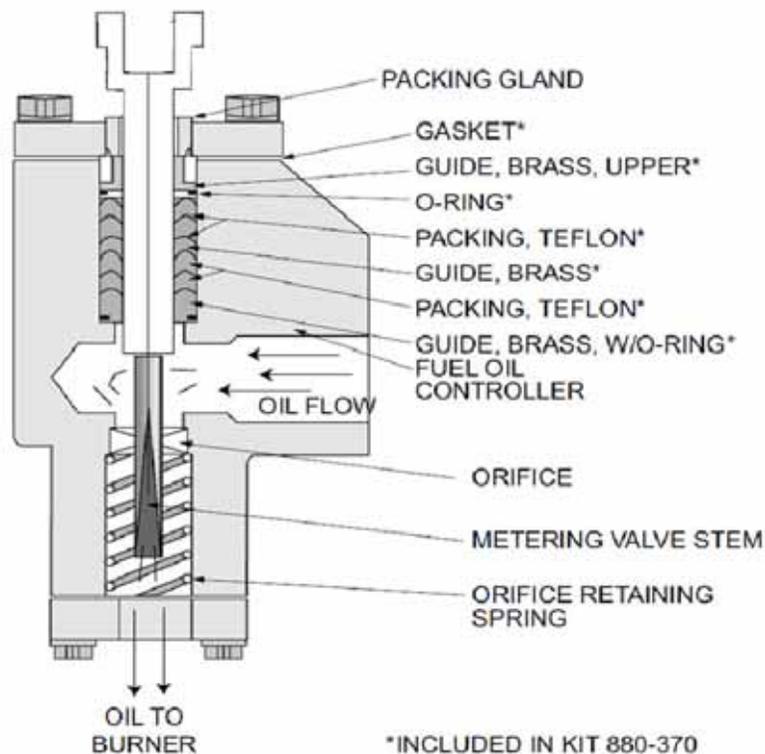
Fuel Stem Packing, Cross-Section
